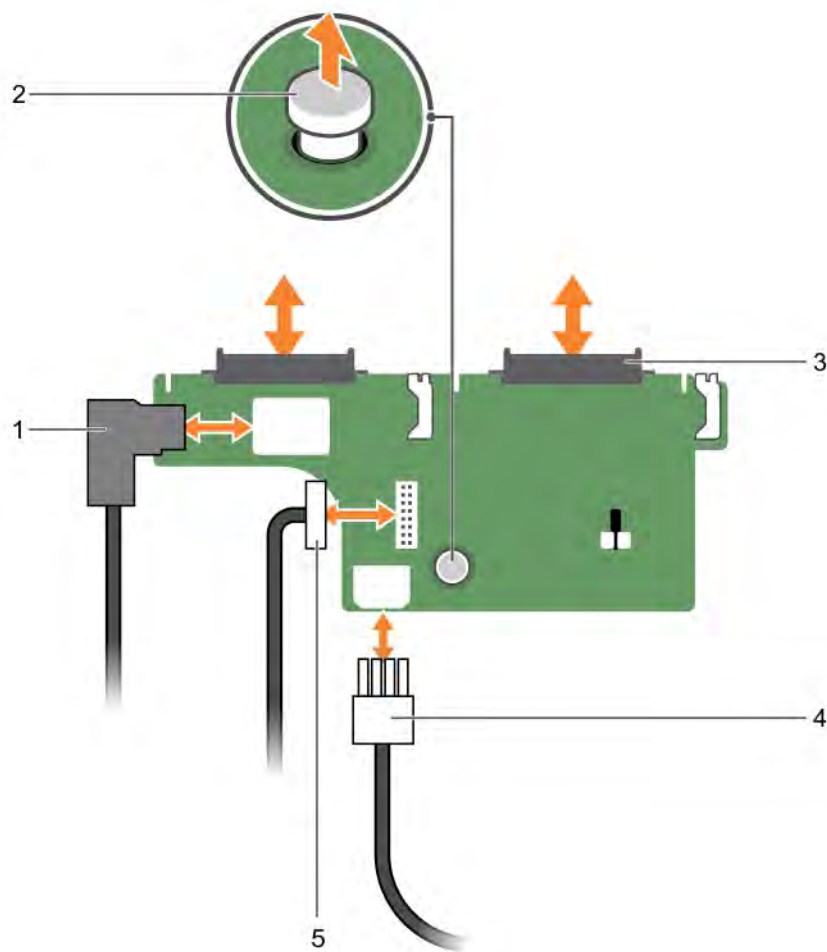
Removing and installing the optional 2.5 inch (x2) hard drive backplane
